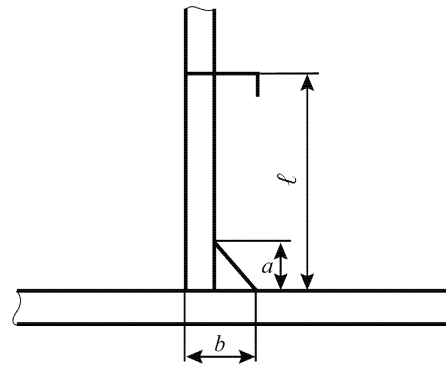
Bracket at lower end of ordinary stiffener on plane bulkhead
